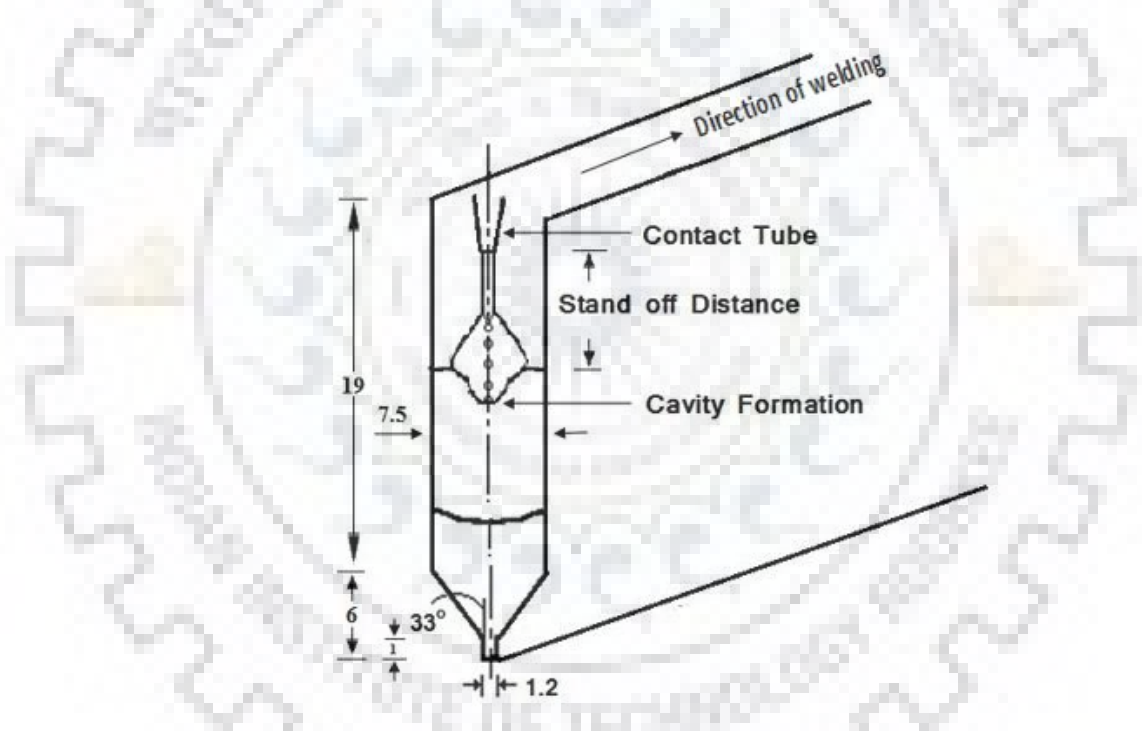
Schematic diagram of metal deposition in a narrow weld groove with the formation of cavity in weld pool. (All dimension in mm)
